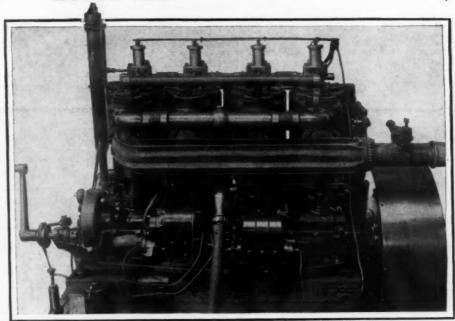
FOUR-CYLINDER MOTOR CAR ENGINE CONVERTED BY BELLEM TO RUN ON KEROSENE AND CRUDE OIL
